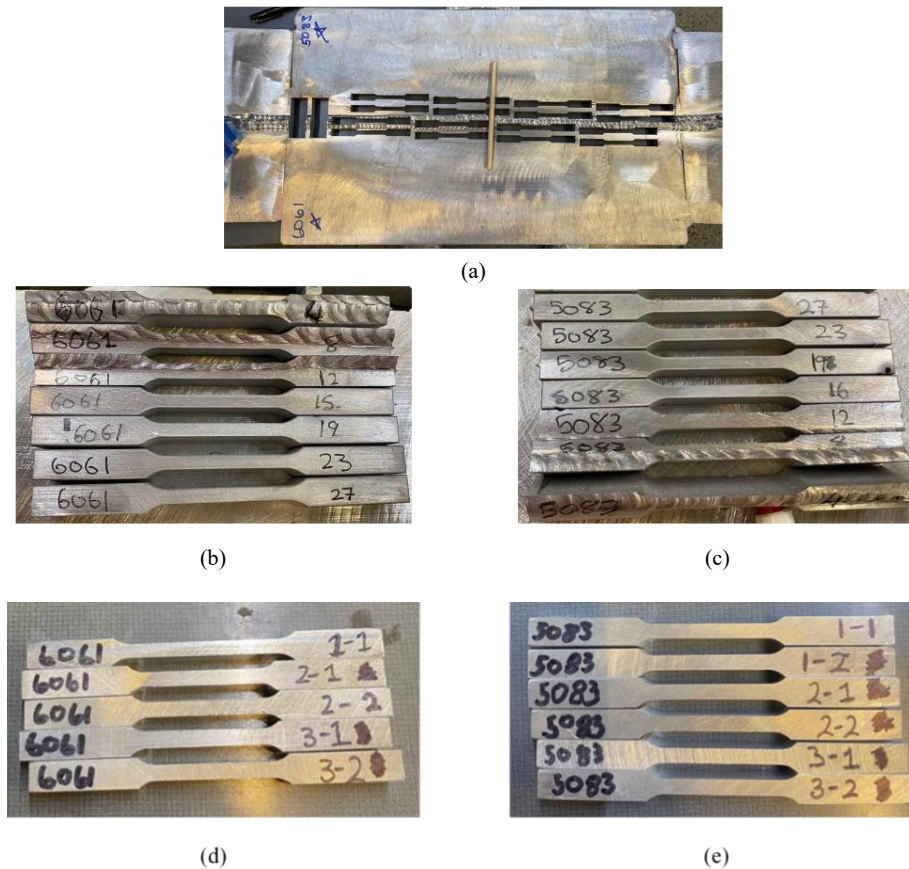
Coupons used in ancillary testing (a) location of HAZ coupons after they were extracted from the welded specimen, (b) HAZ coupons for AA5083-H116, (c) HAZ coupons for AA6061-T6 (d) BM coupons for AA6061-T6 (e) BM coupons for AA5083-H116.
